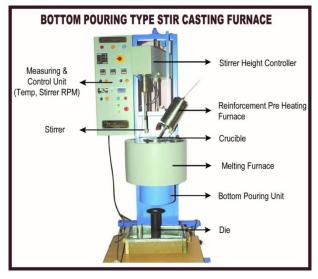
Bottom pouring type Vacuum Stir Casting Equipment
